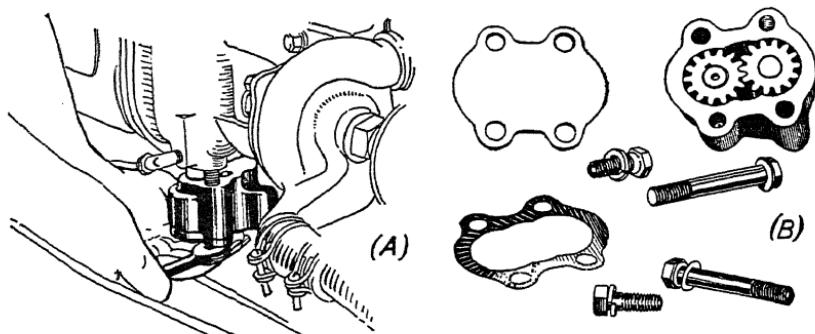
A—Removing a Gear Type Oil Pump; B—The Gear Type Pump Disassembled
